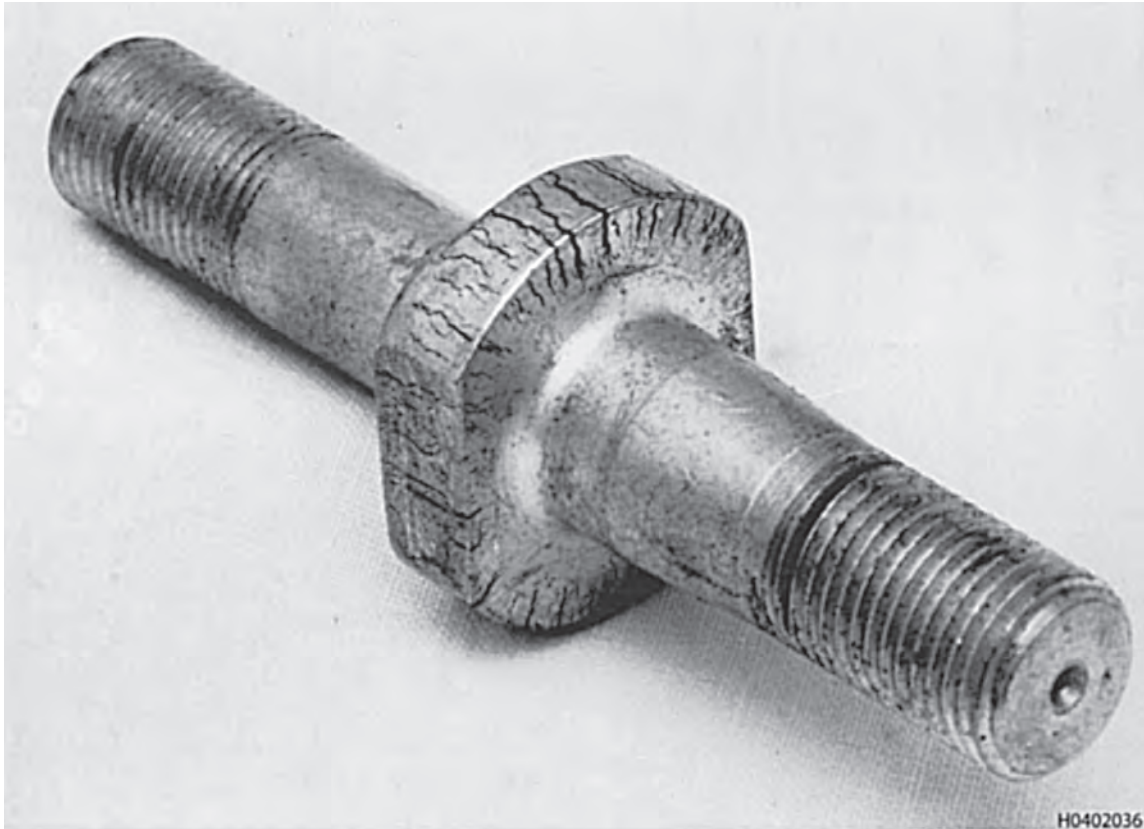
Magnetic Particle Indications of Forging Cracks or Bursts in an Upset Section, Severe Case
